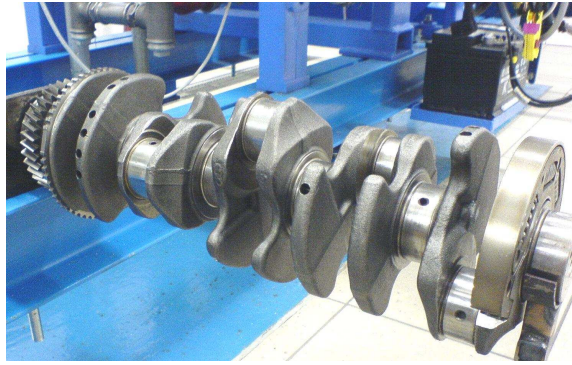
General view of engine crankshaft, inertial vibration damper on the right
